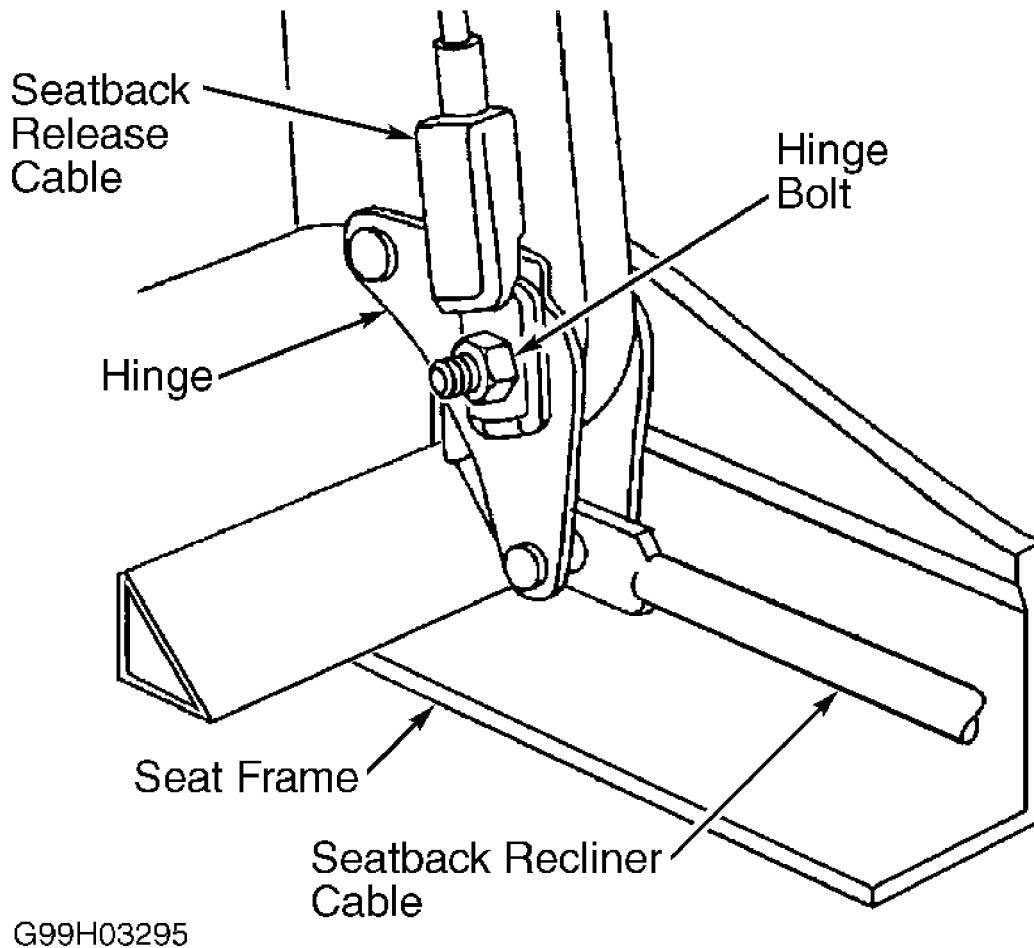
Locating Seatback Release & Recliner Release Lever Cables
